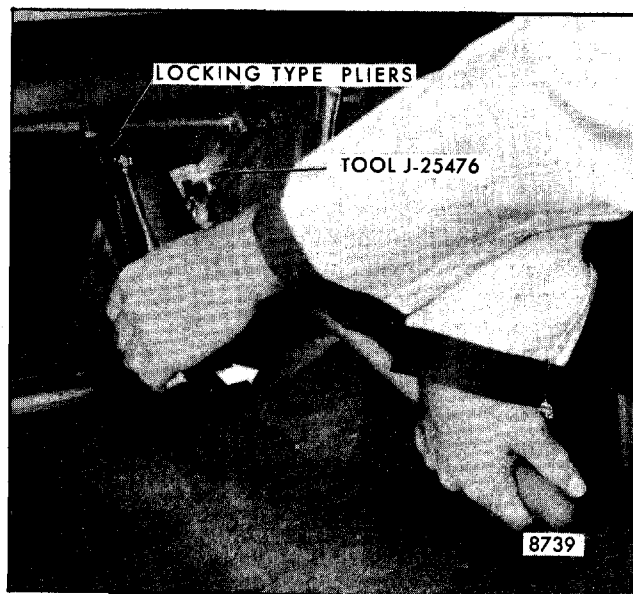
Torque Rod Tool Removal - Cadillac "K" Style
